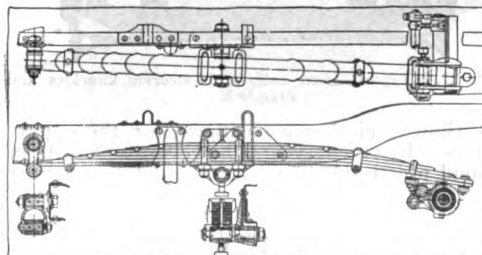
Top view, side view and two cross-sectional views of cantilever spring in its relation to a motor car frame.
